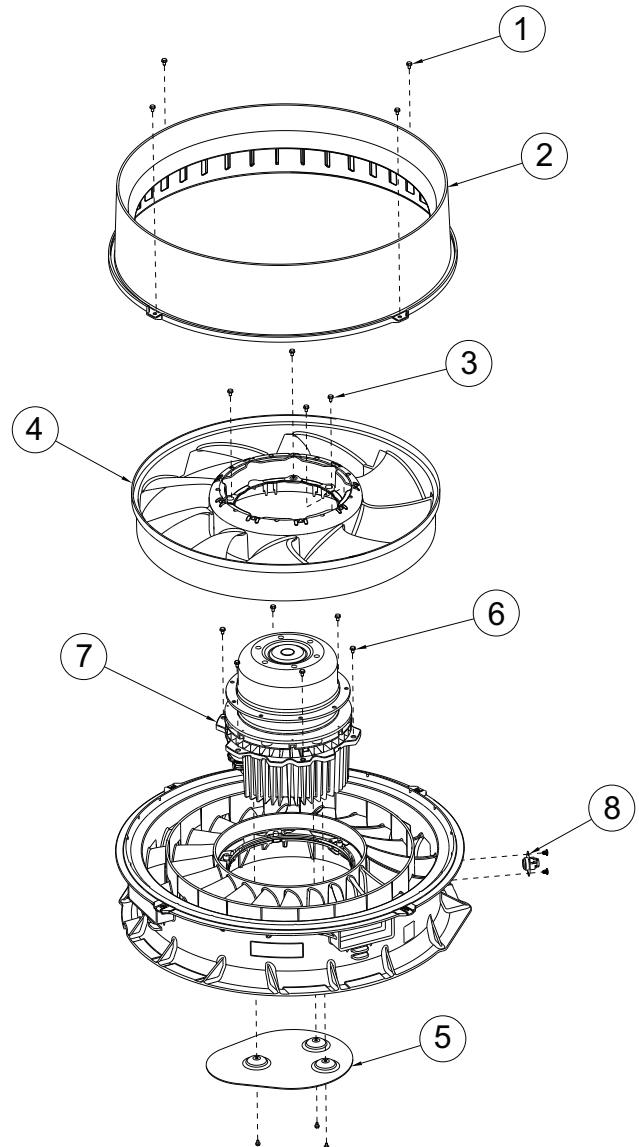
Disassembling High Static Motor and Fan Assembly
